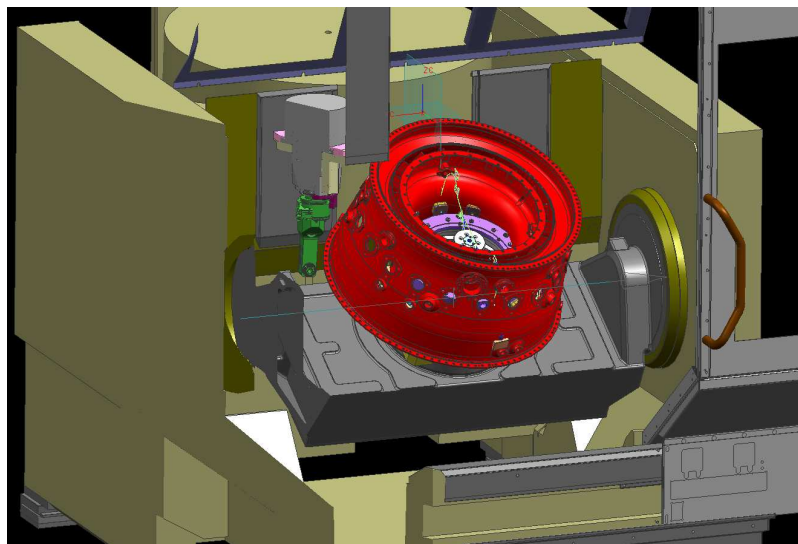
Tool collision analysis using machine model, fixture, tool and machining assy (UG NX4)
